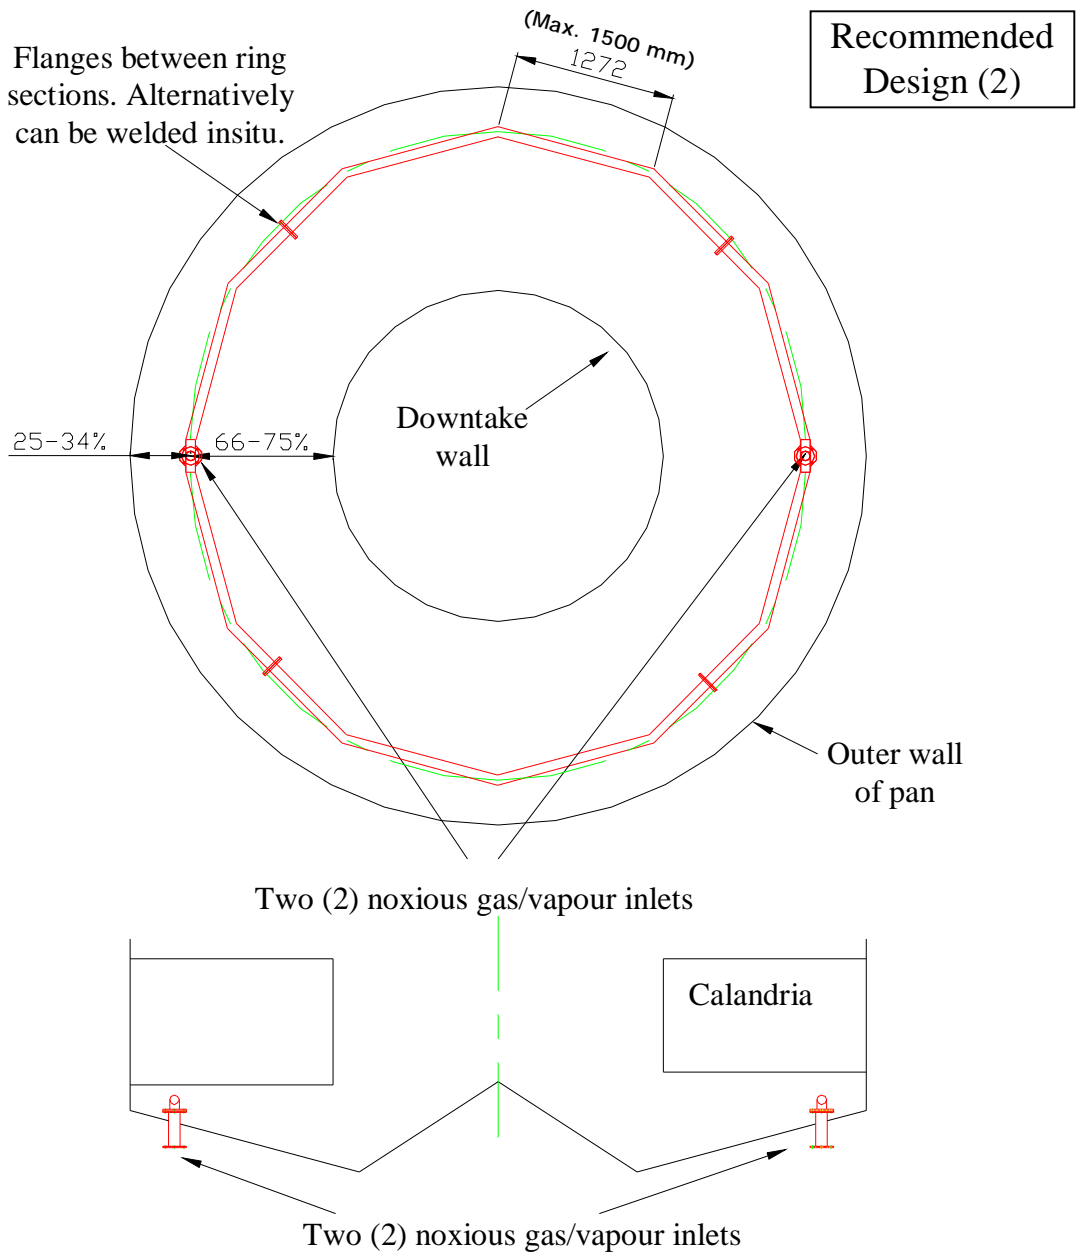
An alternative arrangement for the Jigger Tubes installed in a batch pan.
